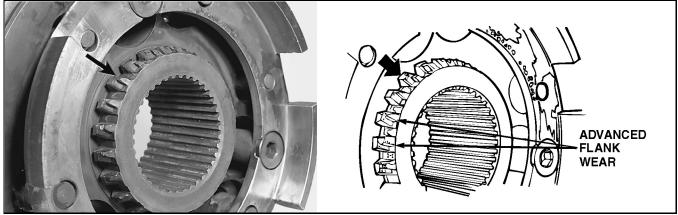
Synchronizer Hi-Lo Sliding Clutch
